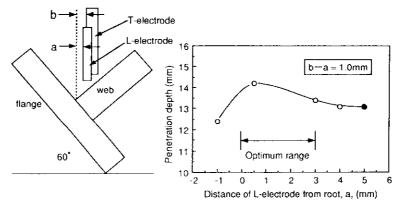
Effect of wire location on penetration depth in fillet welding without groove
